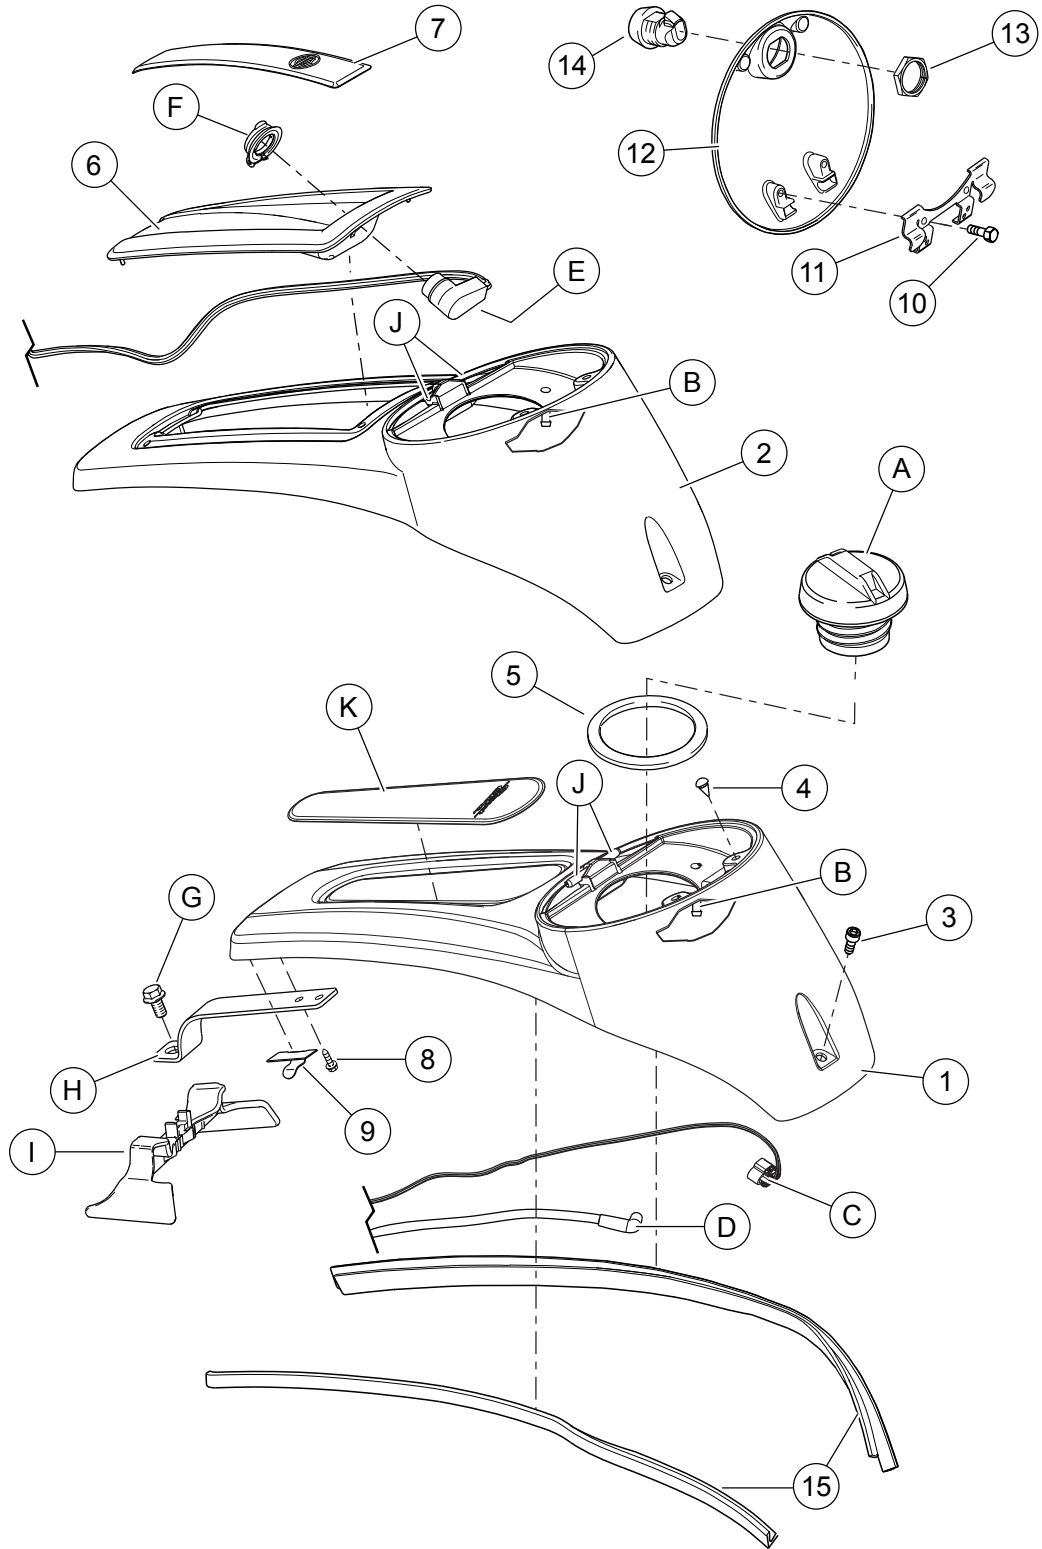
Service Parts: Console, Fuel Door, Fuel Door Release Kits
